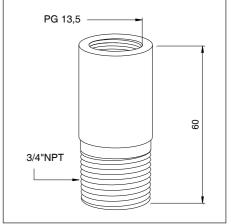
Dimensions SC24V Sensor according to DIN 19263:2007-05
